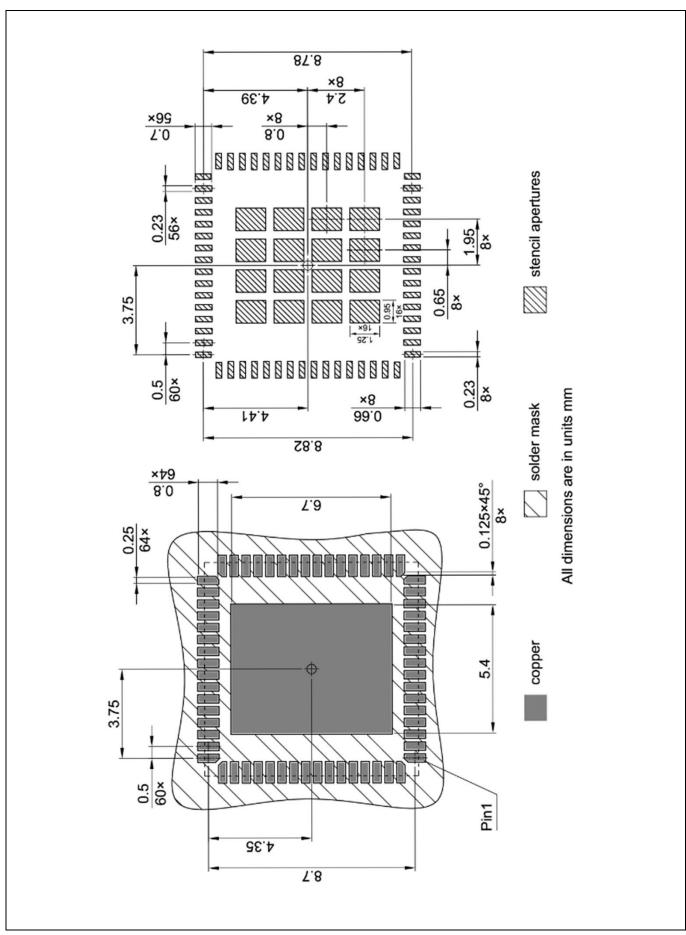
PG-VQFN-64-8 PCB footprint dimensions
